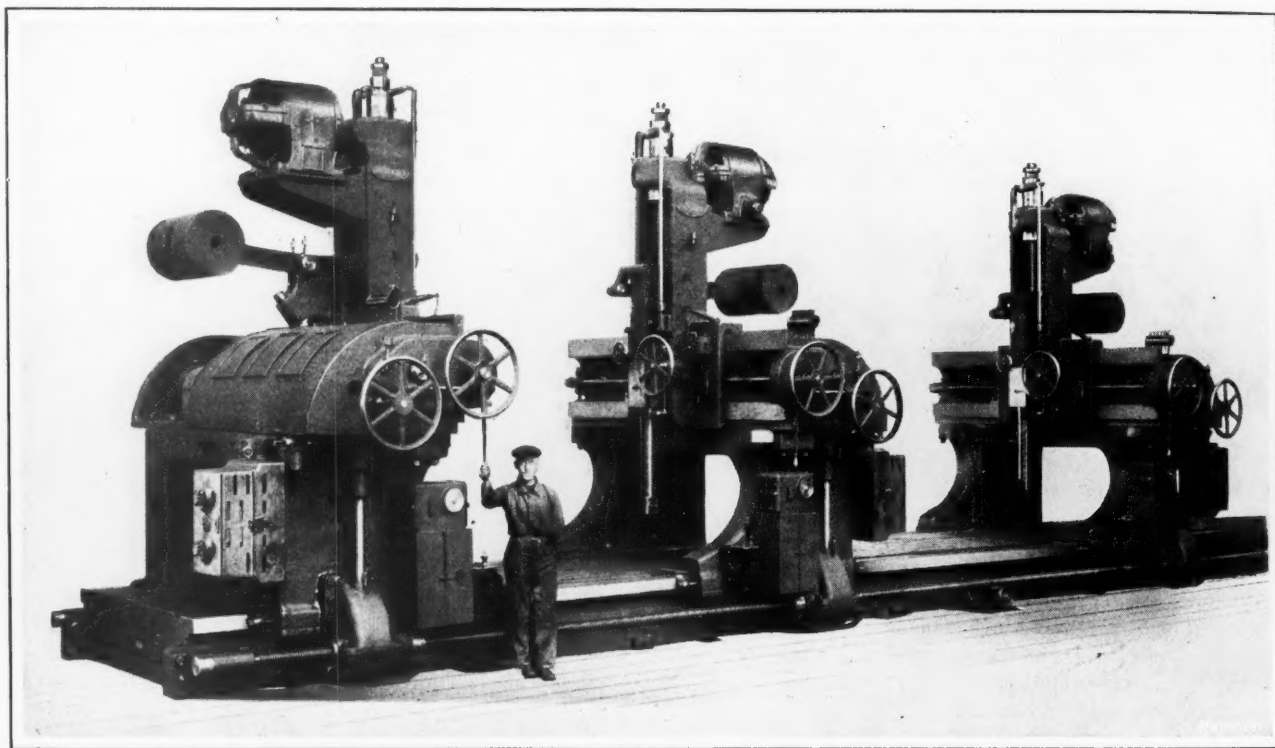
Niles-Bement-Pond Locomotive-frame Slotting Machine equipped with Reversing Motors for driving Each Head
